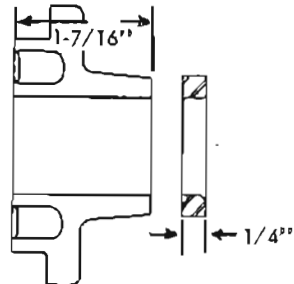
Thrust Washer B-12-45450 with Thrust Hub Assembly B-45451A1
